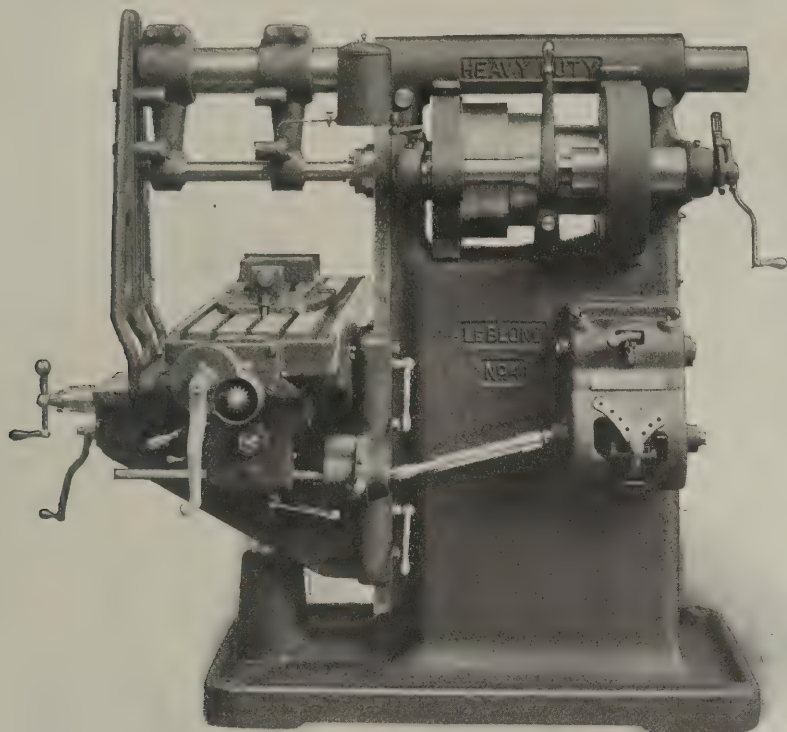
The Le Blond No. 4 Cone-type Milling Machine
